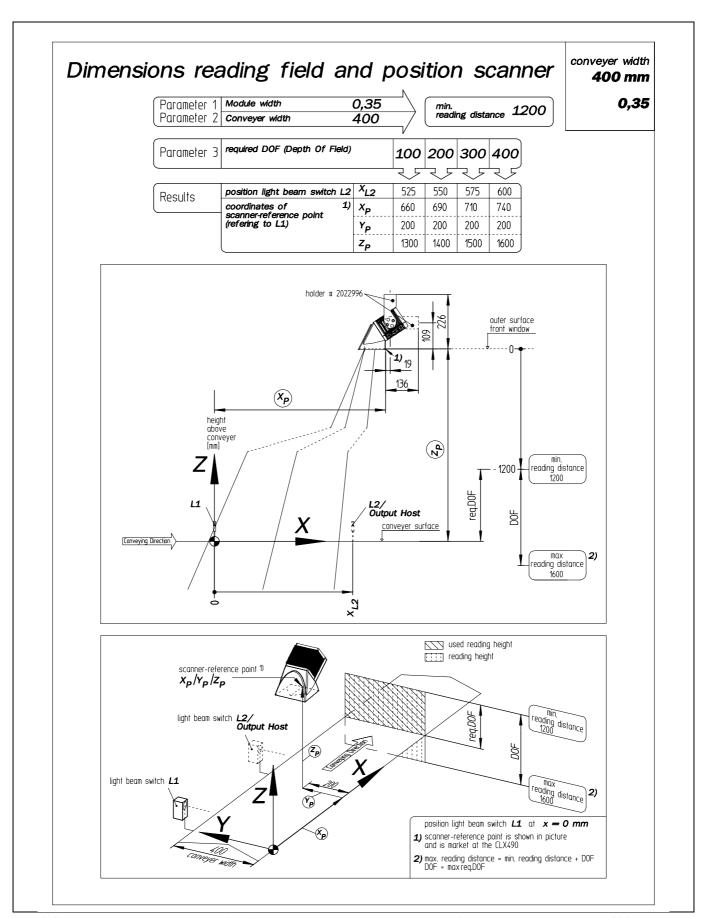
Required mounting position of the CLX above the conveyor belt (resolution 0.35 mm, conveyor belt width 400 mm)
